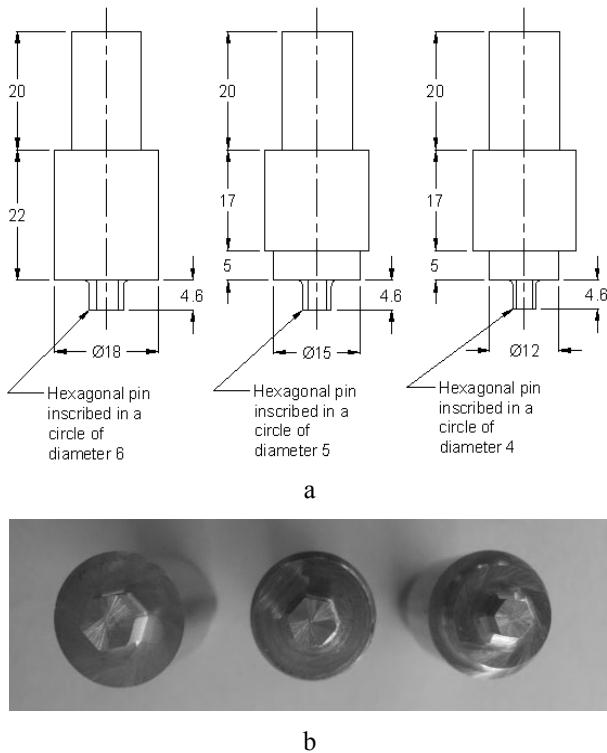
Friction stir welding tools: a - profile and dimensions of the tools, b - photograph of the FSW tools
